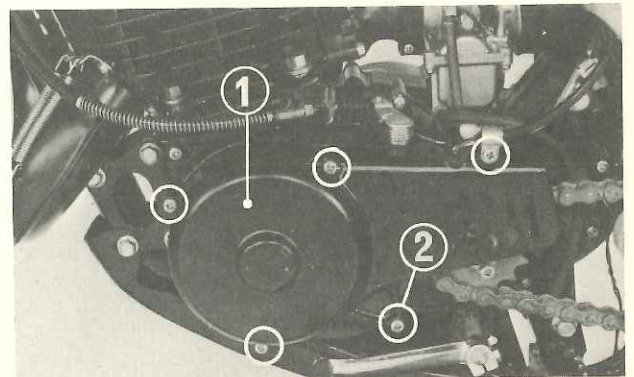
(1) Left crankcase (2) 6mm screw
